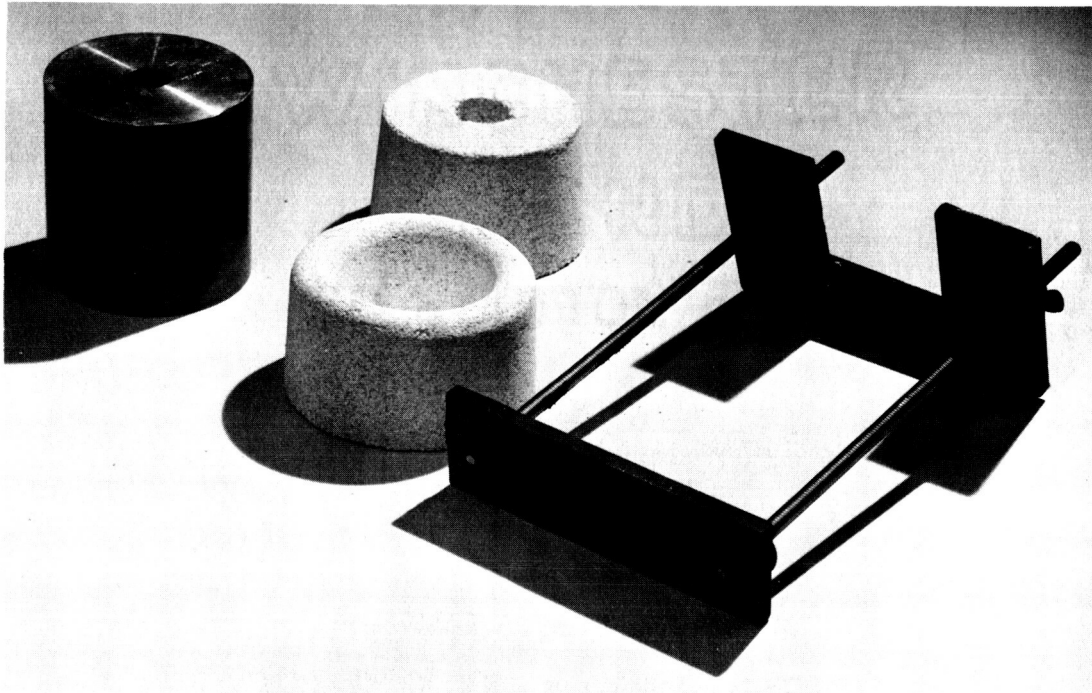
SECTIONS OF COMPOSITE MOLD, COPPER CHILL MOLD, FUSED SILICA POURING CUP AND MOLD, AND CLAMP.
